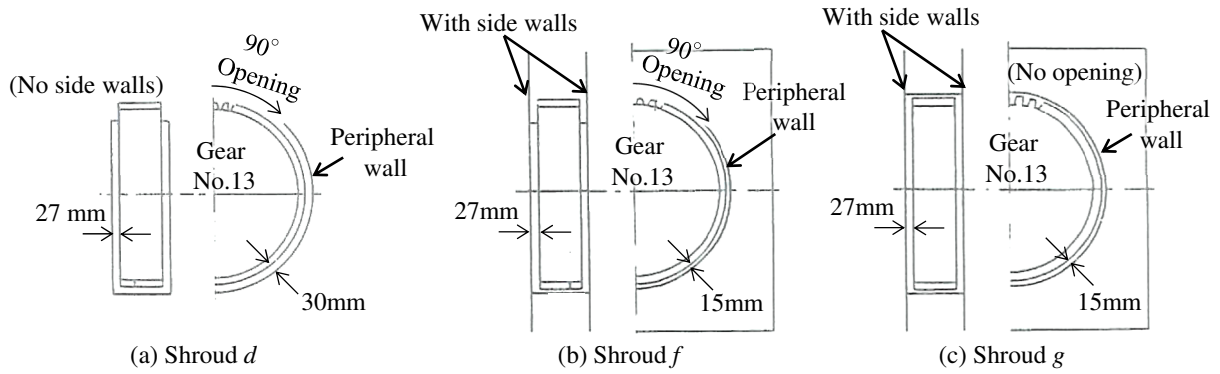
Shrouds for Gear No. 13 (one-axis spur gears, GX2)
